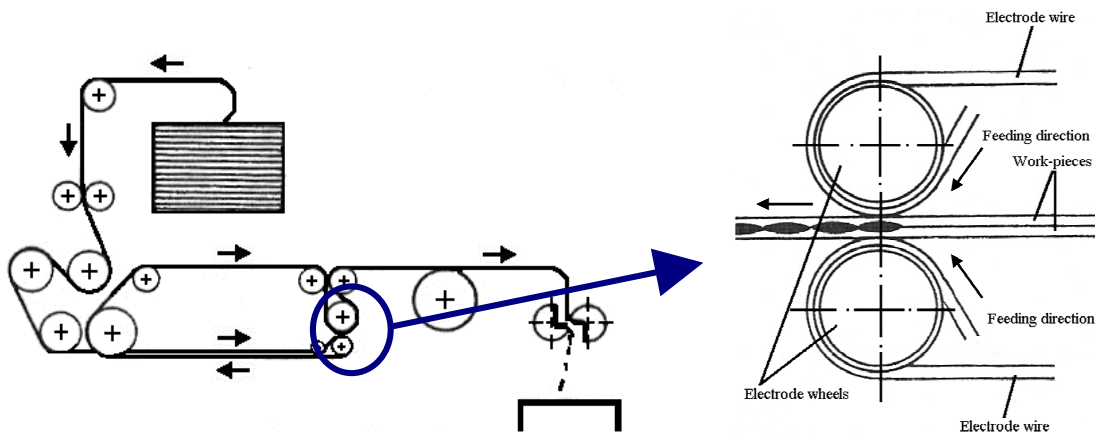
Overview of the copper wire-feeding system employed with wire welding, which incorporates the profiling rolls, guiding rolls, flattening rolls and chopping mechanisms at the end. On the right-hand side an enlargement of the actual welding unit is shown [37].
